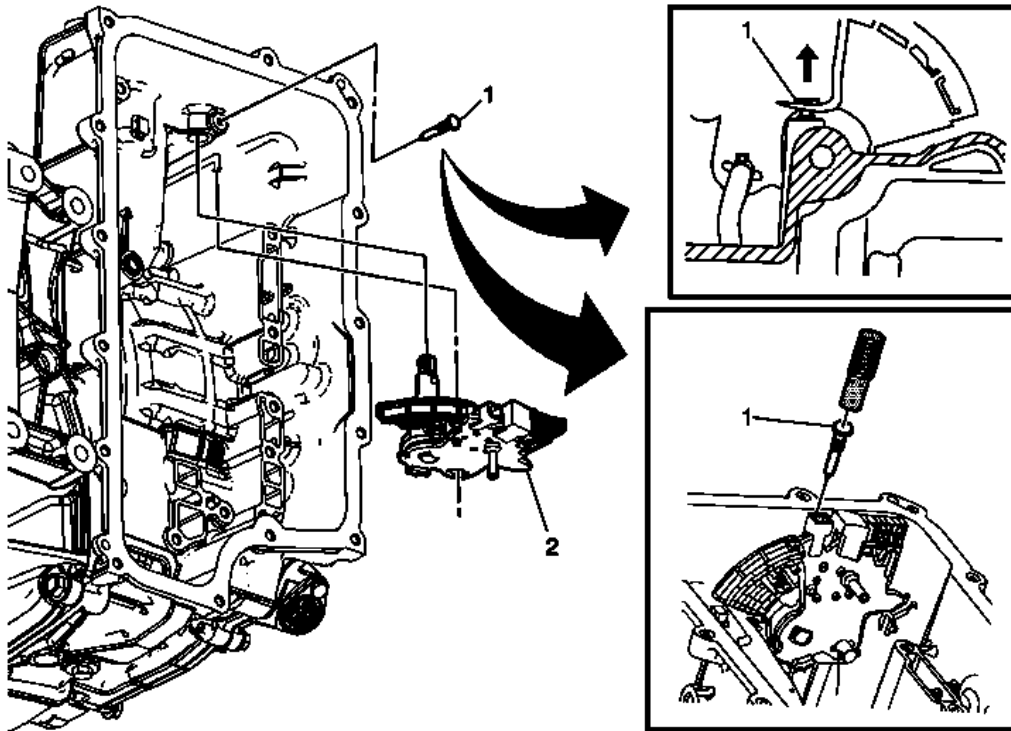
Identifying Manual Shift Detent Lever & Shaft Position Switch Assembly
